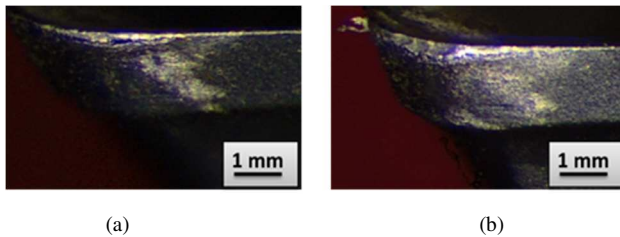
Flank wear (Vb) on wet machining of (a) SLM and (b) C&W.
